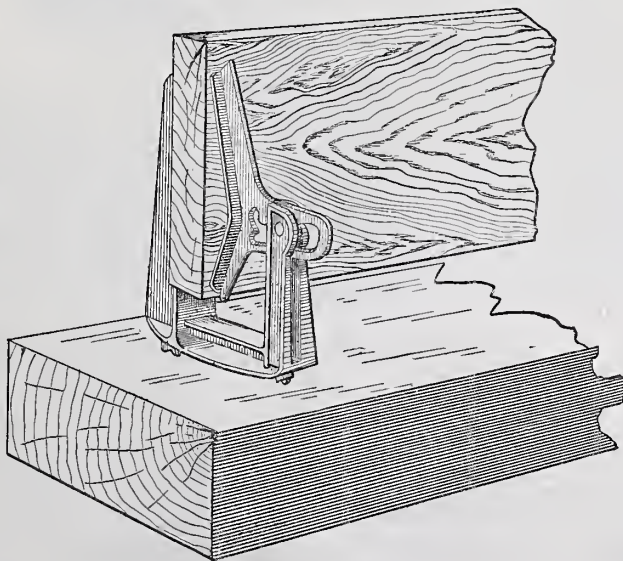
The Clamp Mounted on a Beam and Holding a Board for Sawing or Planing.
